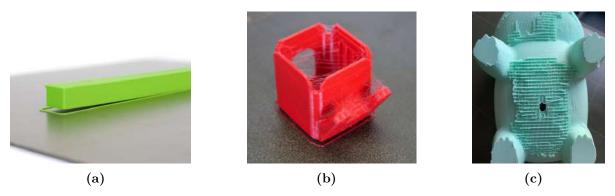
Examples of commonly encountered 3D printing issues: (a) Warping [74], (b) Stringing [75], and (c) Hard-to-remove grid supports [76].
